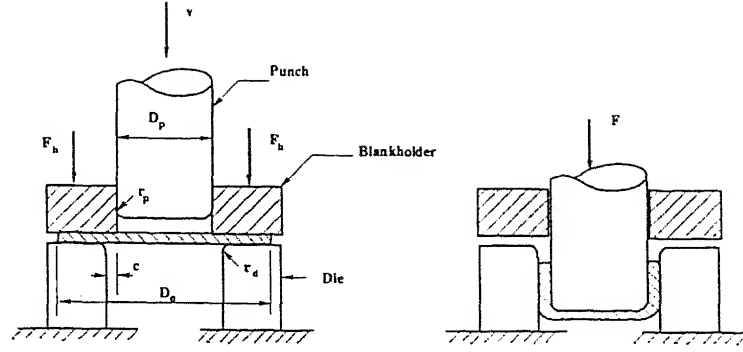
Drawing of a cup-shaped part: Symbols  $c$  = clearance,  $D_0$  = blank diameter,  $D_p$  = punch diameter,  $r_d$  = die arc radius,  $r_p$  = punch corner radius,  $F$  = drawing force,  $F_h$  = blank-holding force [Groover, 1995].
